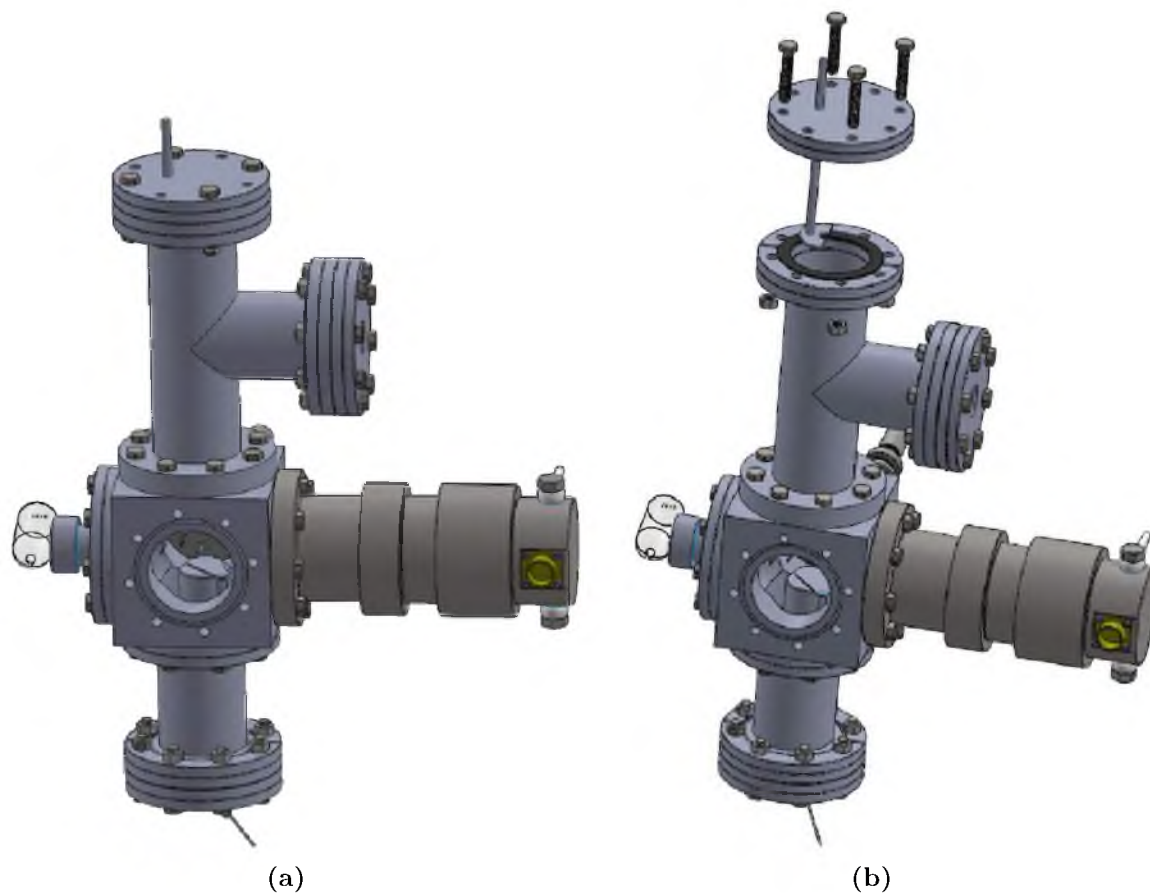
Solidworks® 3D rendering of LTE custom evaporator. (a) Complete system. (b) Exploded view showing sample holder.
